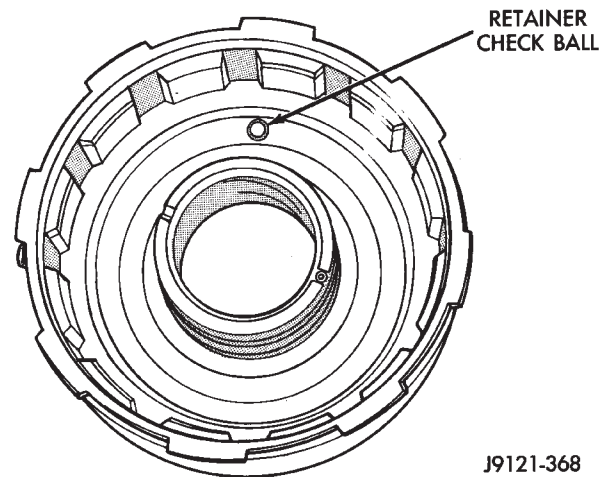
Front Clutch Piston Retainer Check Ball Location
